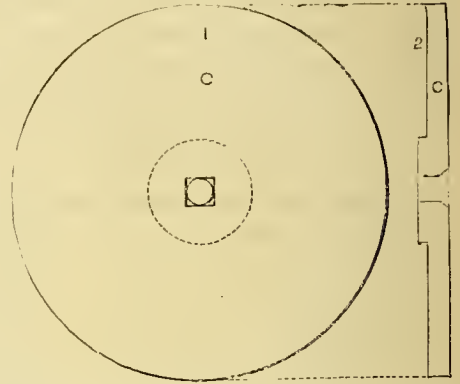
ECCENTRIC CHUCK. 1, Plan. 2, Section.
